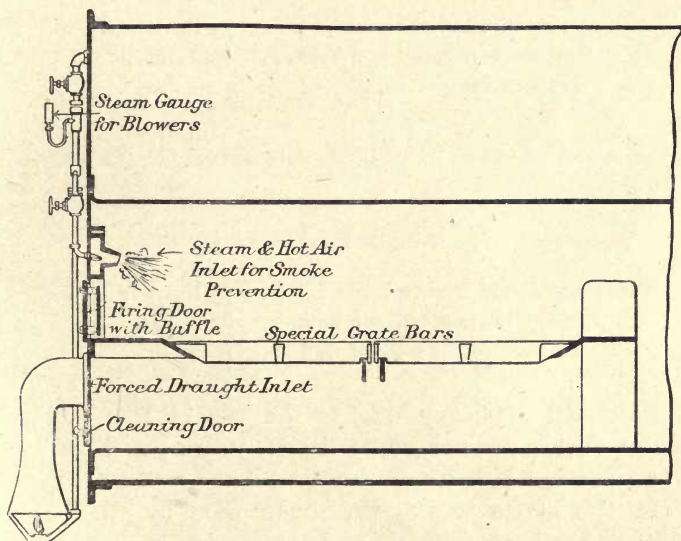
Section of "Loidis" Patent Furnace for Lancashire or Cornish Boiler.
